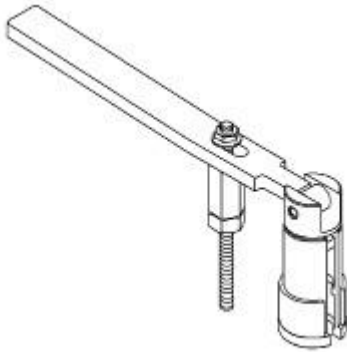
REMOVER/INSTALLER, FUEL INJECTOR - 9010A
